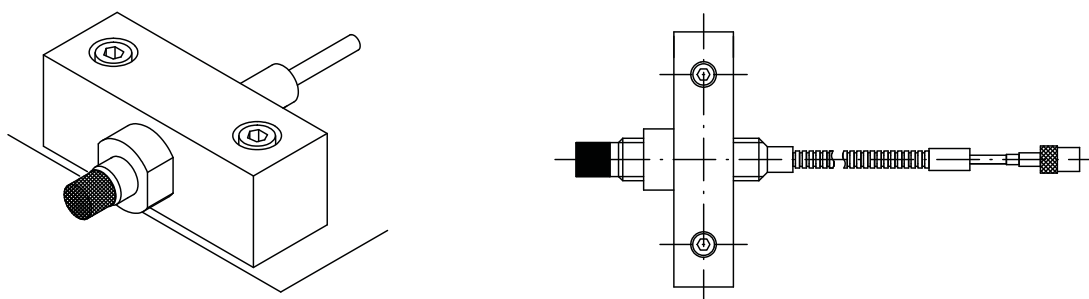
Mounting support (drilled and threaded) for a reverse mount proximity sensor
